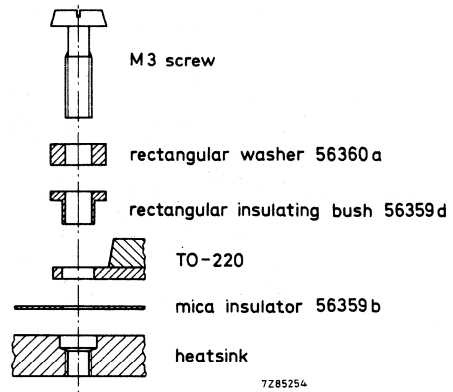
Insulated screw mounting with rectangular washer into tapped heatsink. Known as a "top mounting".
